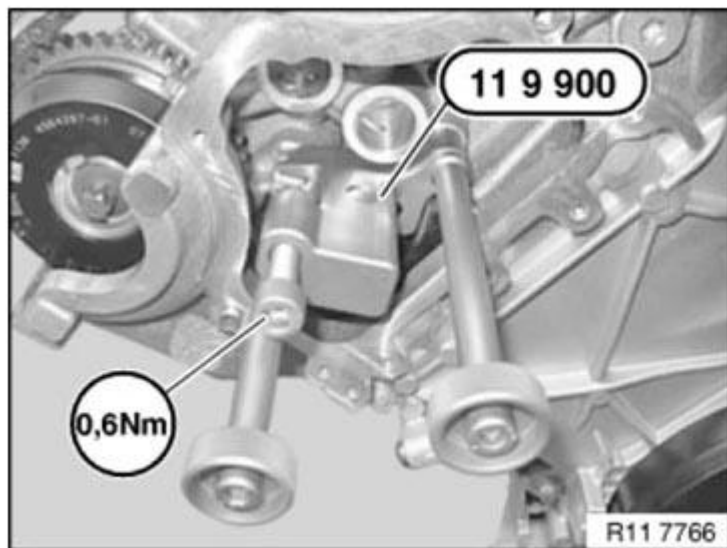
Preloading Hexagon Socket Screw With Special Tool 00 9 250 To 0.6 Nm
